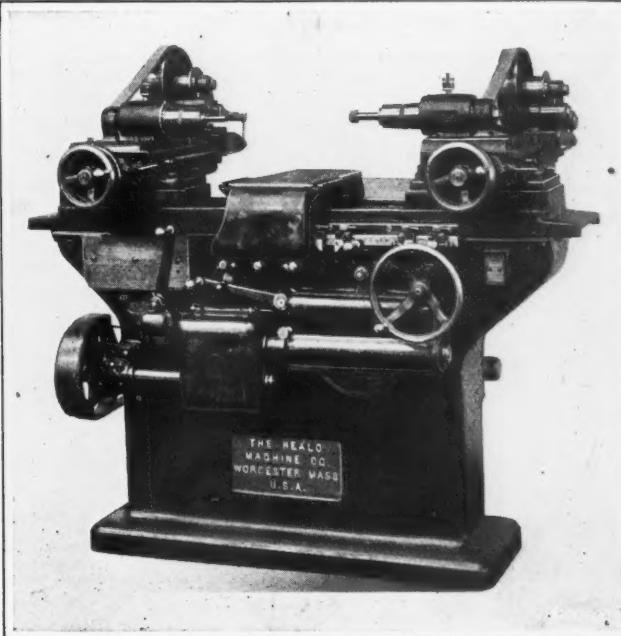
Power-feed Internal Grinding Machine arranged for grinding Both Ends of Cluster Gears, etc.
